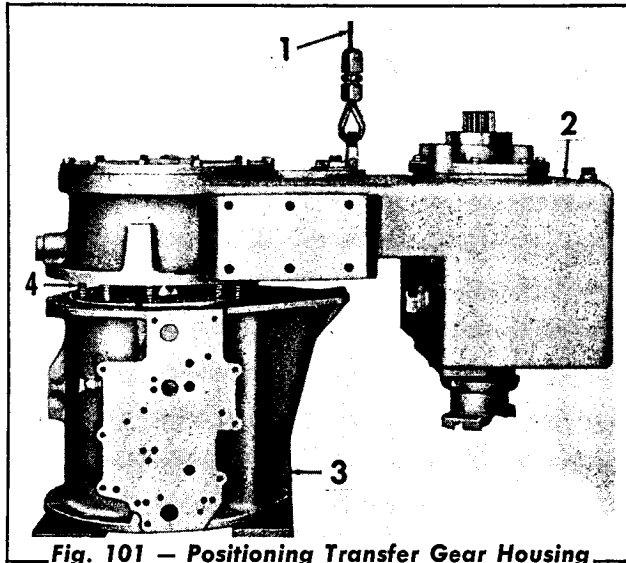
Positioning Transfer Gear Housing for Installation on Transmission Housing
